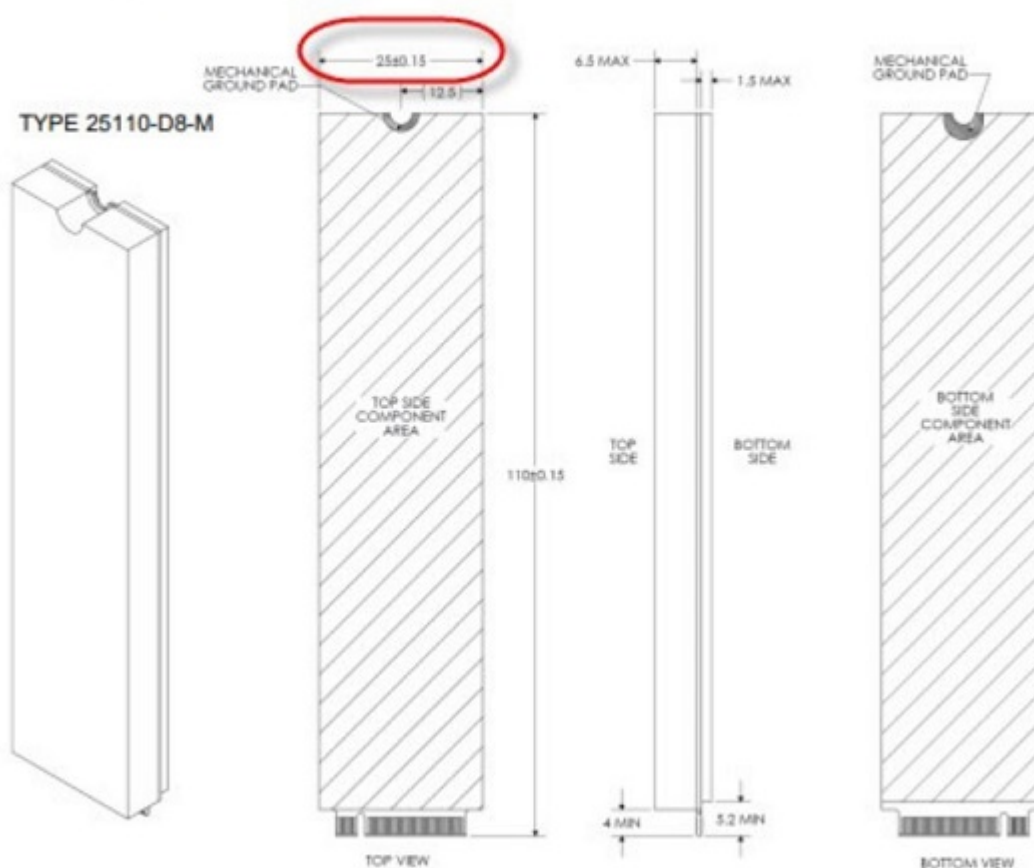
Type 25110-D8-M Mechanical Outline Drawing Example
